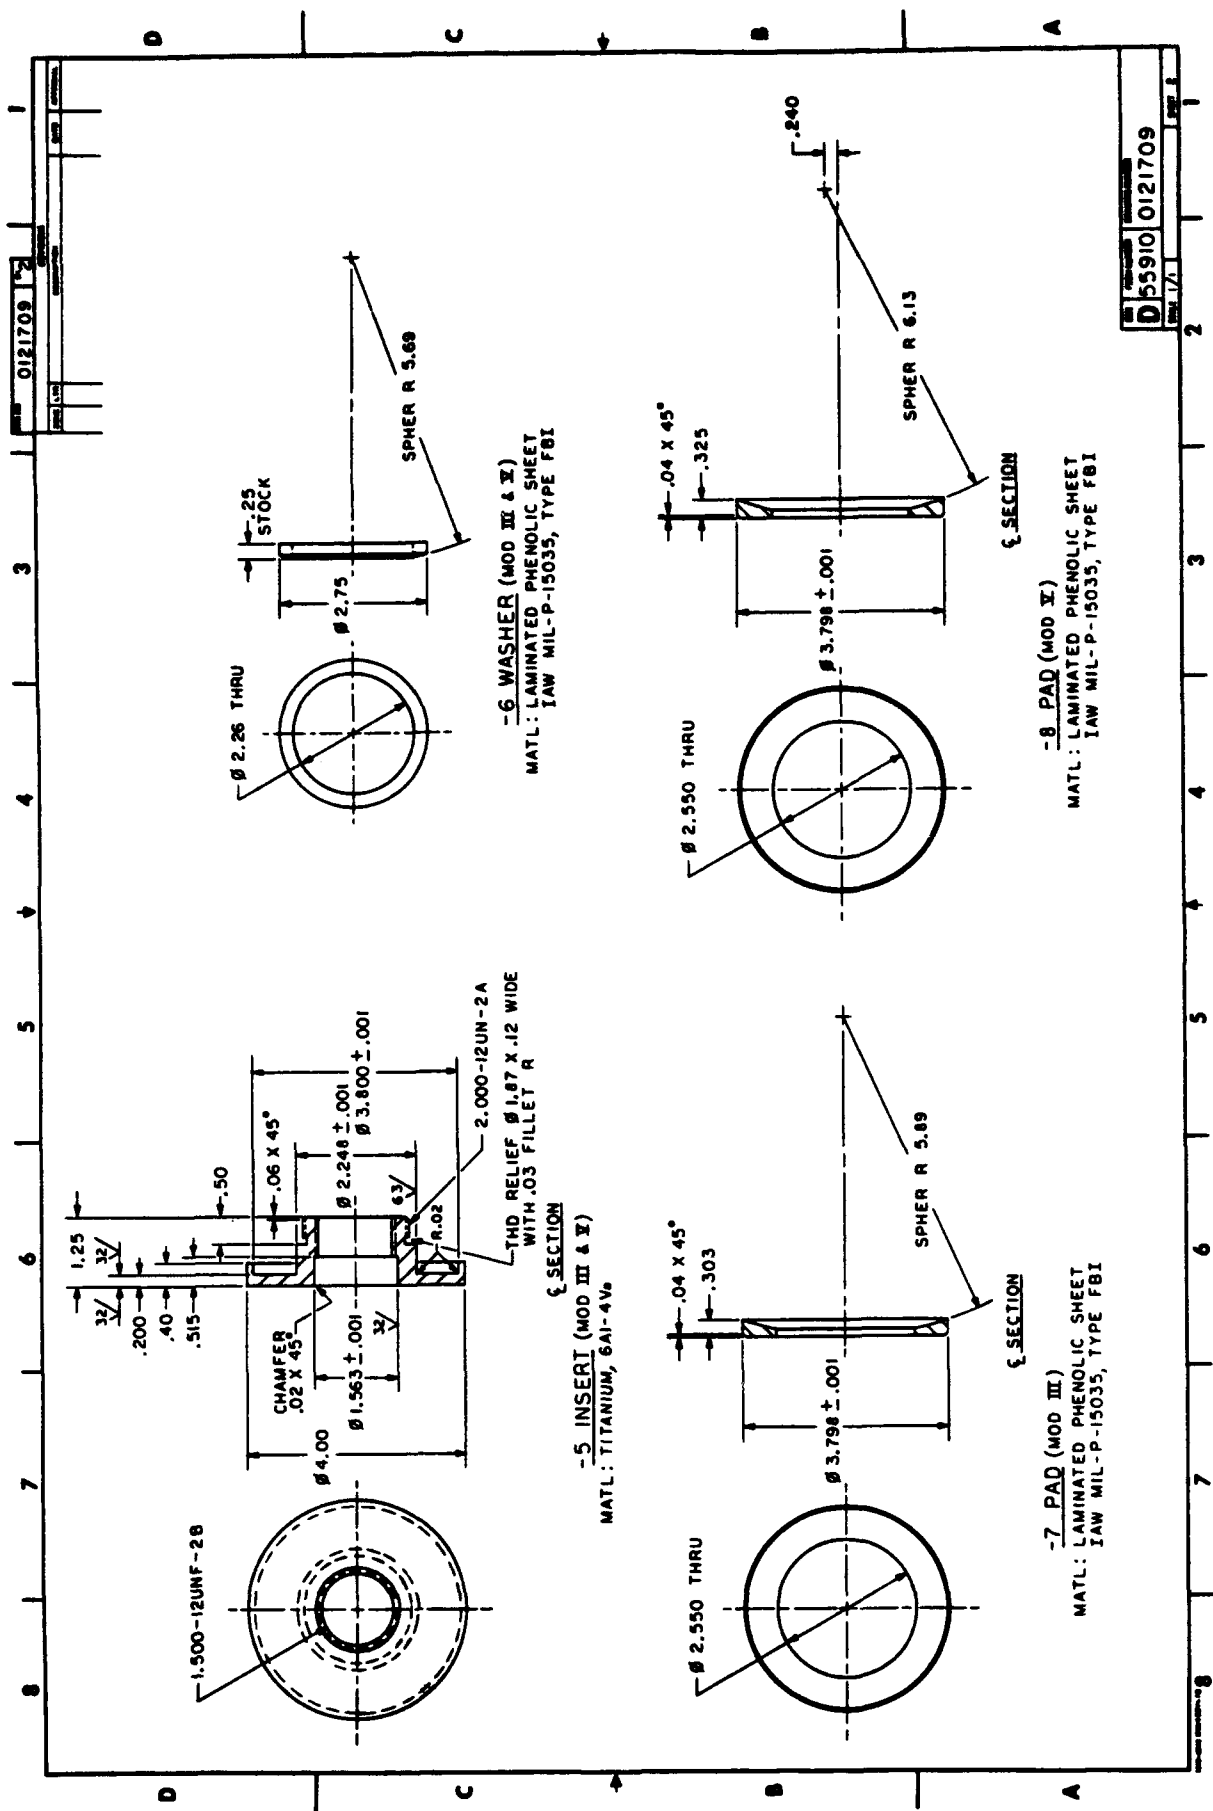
Connector insert for Mod 3 hemisphere incorporating phenolic bearing pads, Sheet 2.
